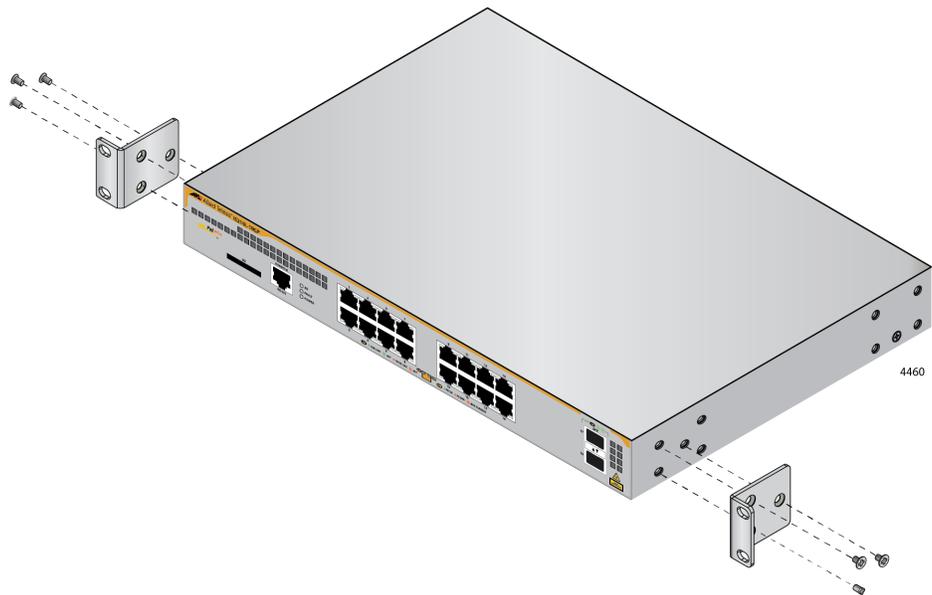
Attach Rack Mount Brackets to AT-IE210L-18GP Switch
